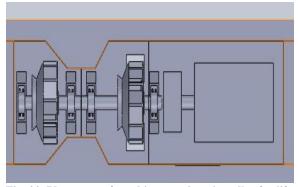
, Placement of machine, gearbox, impeller for lift, impeller for thrust, and holder (top view)
